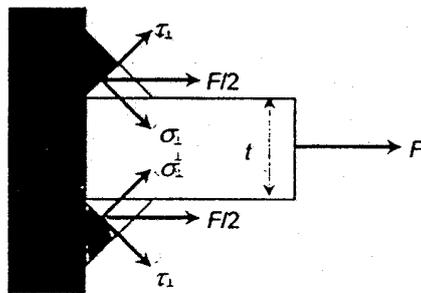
Double fillet welded joint loaded perpendicularly to the weld axis
